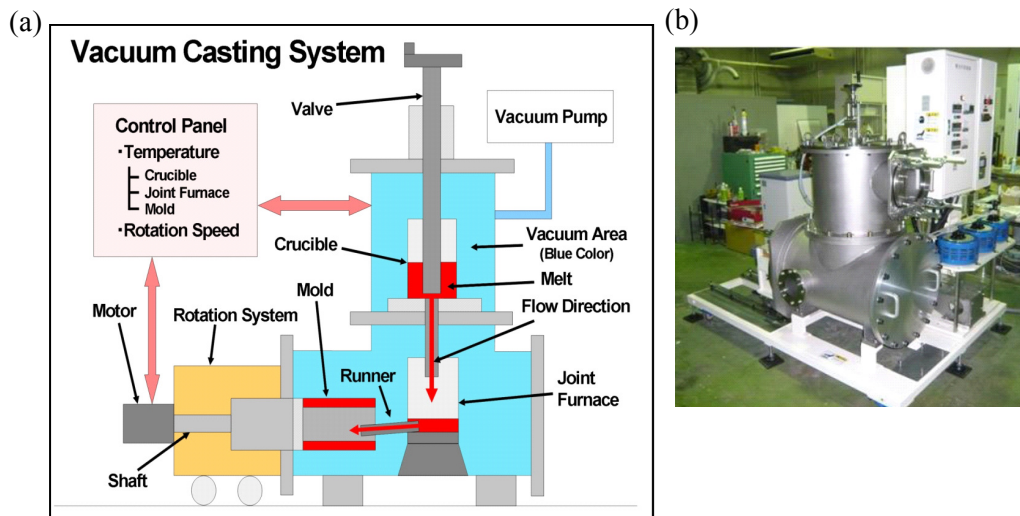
Vacuum centrifugal casting system: (a) the schematic drawing and (b) picture.
